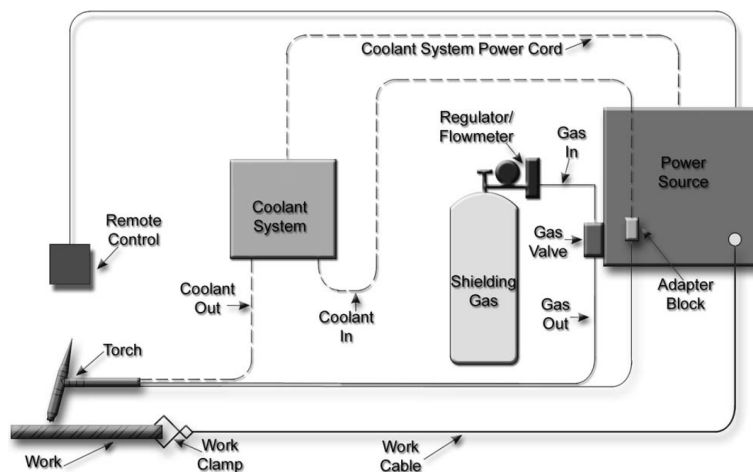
Gas Tungsten Arc Welding Equipment [17]
